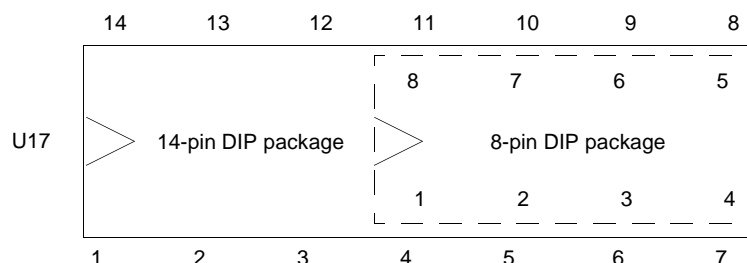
U17 Socket Layout for 14-Pin and 8-Pin DIP Packages
